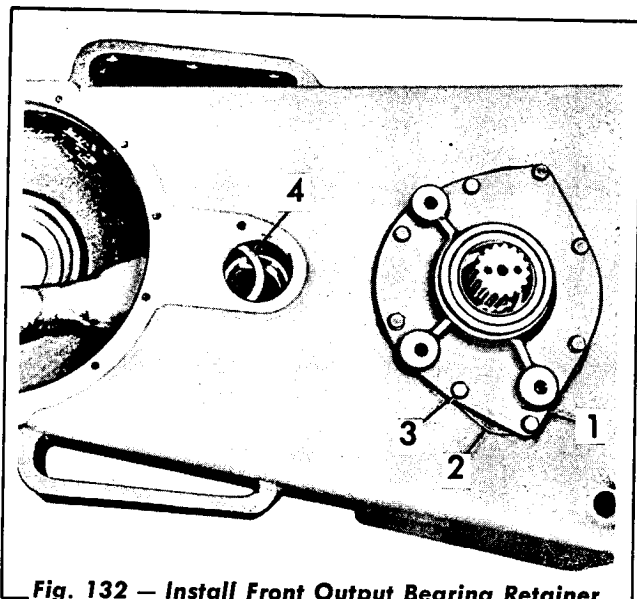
Install Front Output Bearing Retainer, and Transfer Idler Gear Spacer
